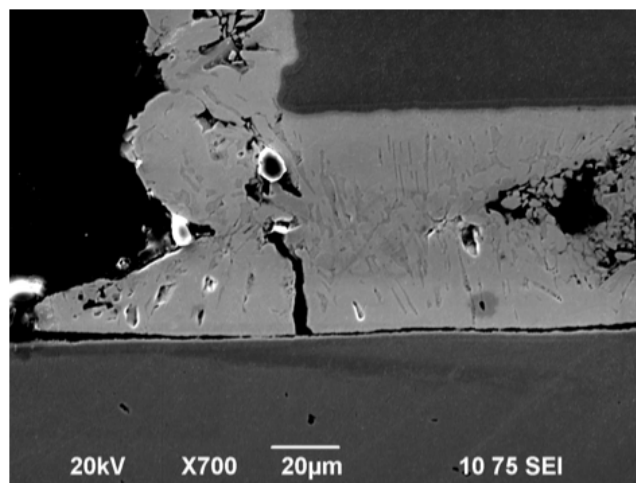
SEM image of solder joint Pin1 in Component U24 on Board F08, IMC Cracks
